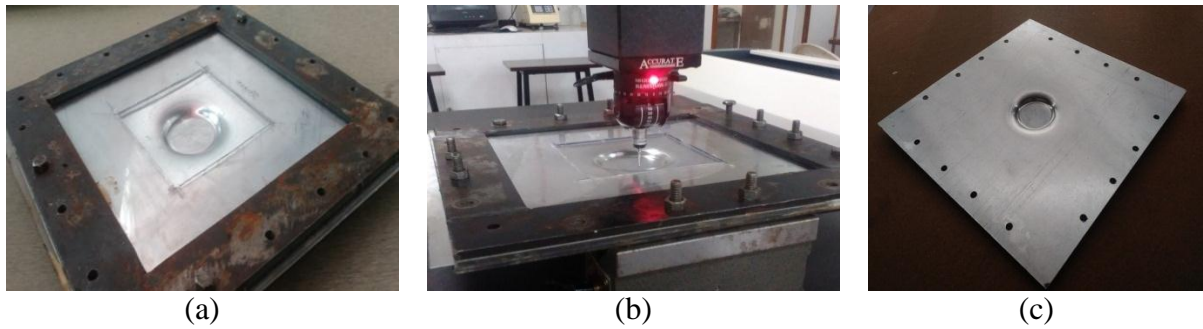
(a) Forming of component, (b) measuring of component and (c) unclamped view of component for stage second
